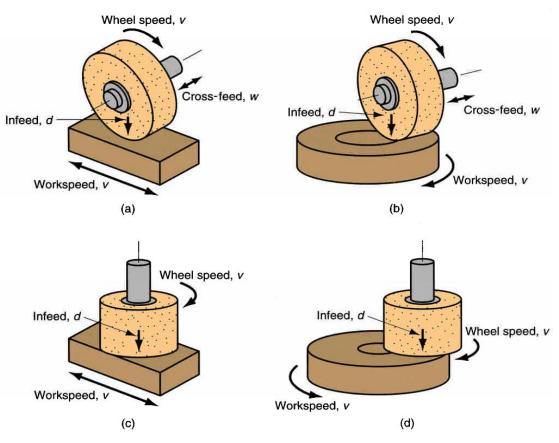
Four types of surface grinding: (a) horizontal spindle with reciprocating worktable, (b) horizontal spindle with rotating worktable, (c) vertical spindle with reciprocating worktable, and (d) vertical spindle with rotating worktable
